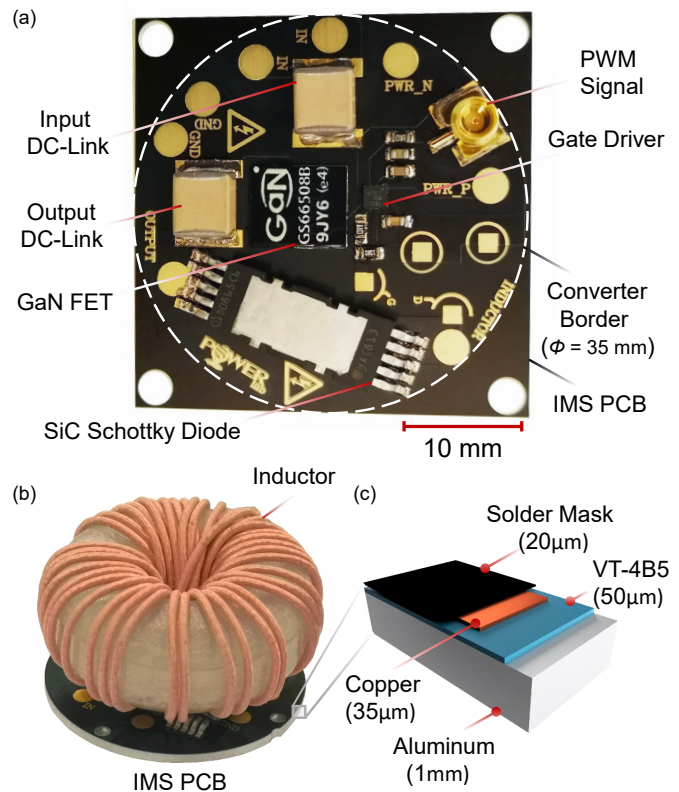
Boost converter design using IMS PCB technology. (a) Single-layer design of the power stage and (b) the compact final design with a 35-mm diameter. (c) The PCB layout enables an extremely-high thermal conductivity (> 60 W/mK), suitable for an ultra-high power density.
